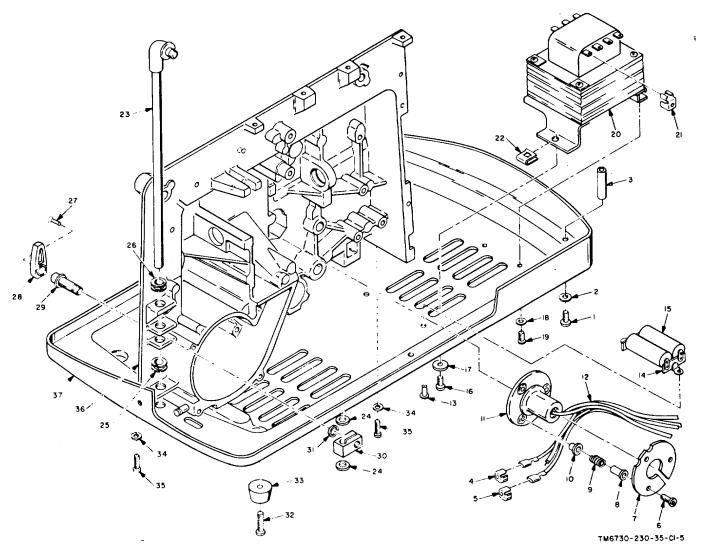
Interlock switch, amplifier, exciter lamp socket, and base details, exploded view (AQ-9A)
